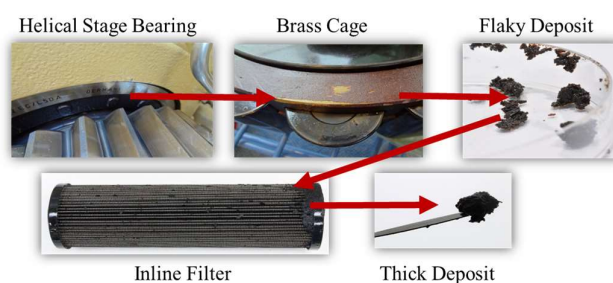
Photos of deposit observed in Wind Turbine Gearbox
